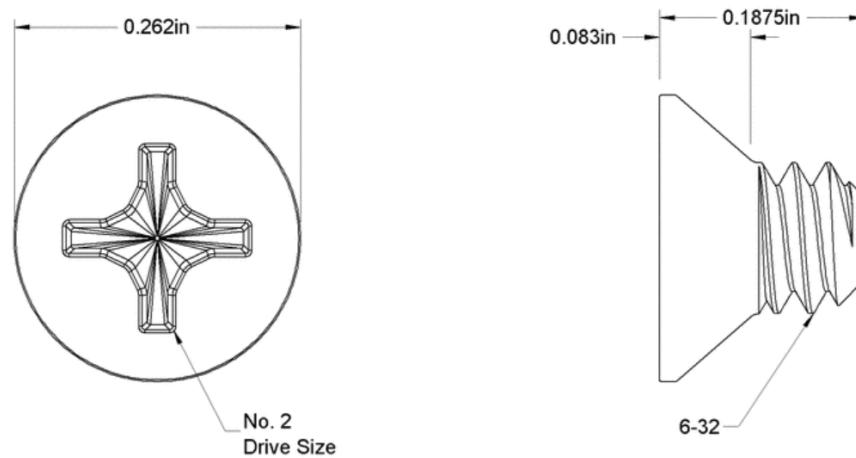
Drawing of the aluminum screws used in the NaCl salt plates.
